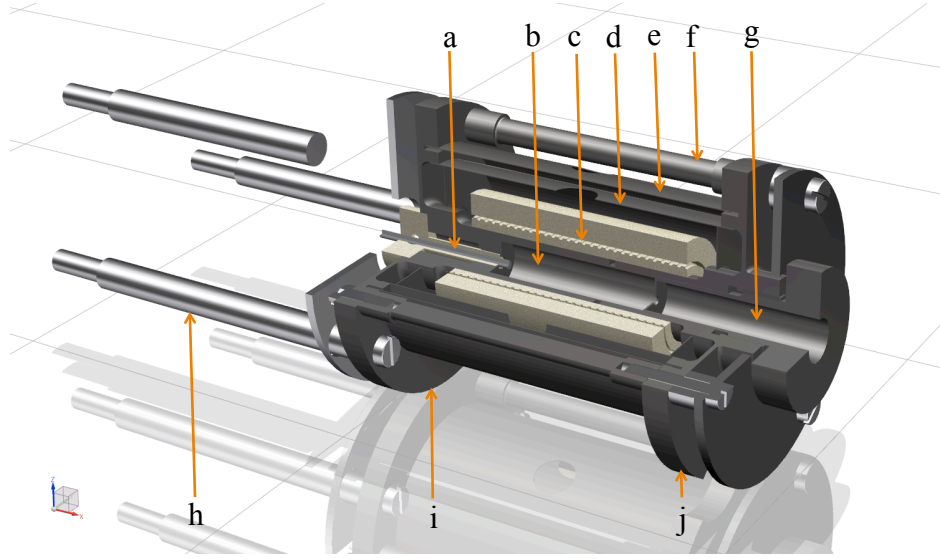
Schematic view of the ^{225}Ra oven: (a) thermocouple; (b) titanium crucible; (c) heater element; (d) inner heat shield; (e) outer heat shield; (f) holding rod; (g) end cap; (h) mounting bars to CF40 feedthrough; (i) back holding flange; (j) front holding flange. The full assembly can be mounted to a CF40 port to a vacuum chamber (see also Fig. 4.7).
